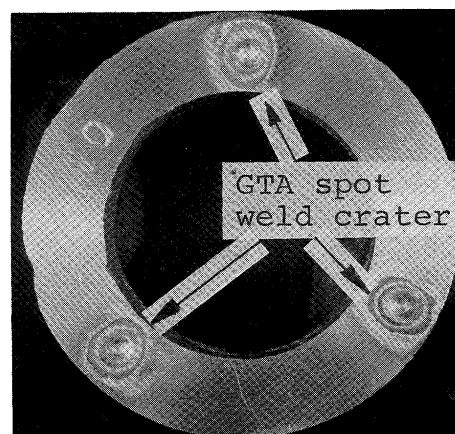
Appearance of specimen tested by GTA spot weld crater cracking test on ring-casting.
